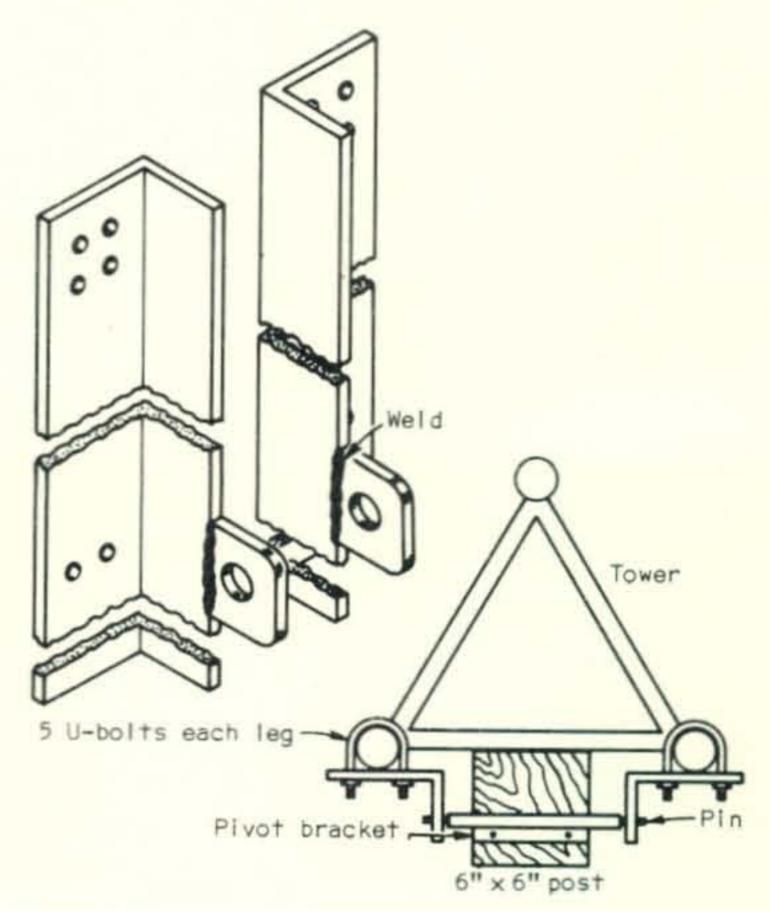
Construction and installation of tower brackets made from heavy gauge angle iron.
